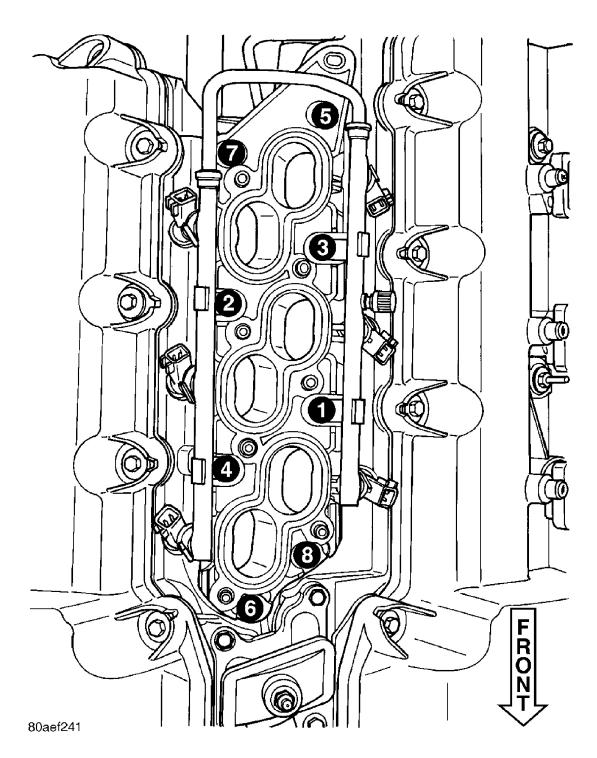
Lower Intake Manifold Bolt Loosening/Tightening Sequence Courtesy of CHRYSLER LLC
